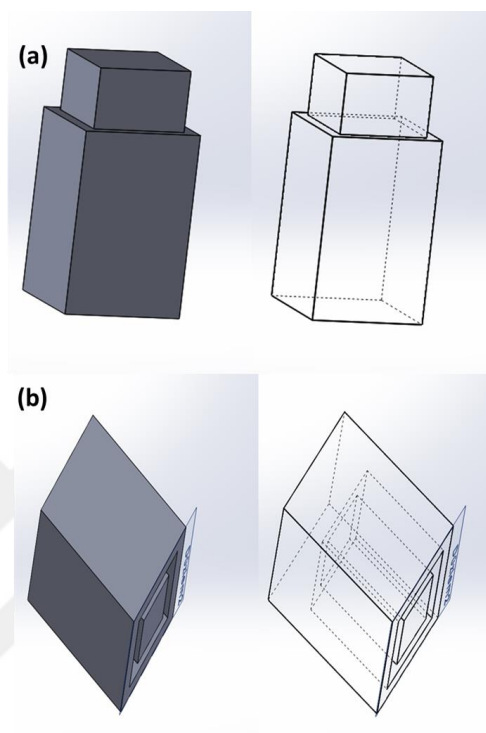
Solidworks drawings: the primitive parts of designed mini photoreactor; a) the container, b) the lid.
